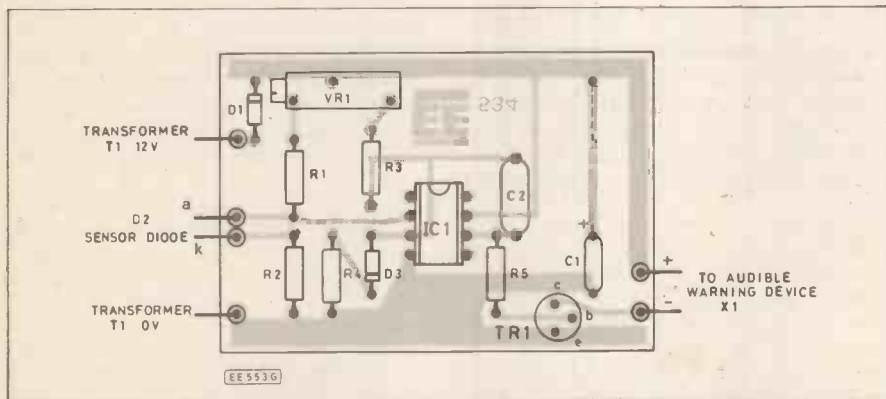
Printed circuit board design and component layout and wiring. Make sure the anode of the sensor diode is connected to the upper pin. T1 should be connected to the mains via a fuse and mounted in an earthed metal case.
